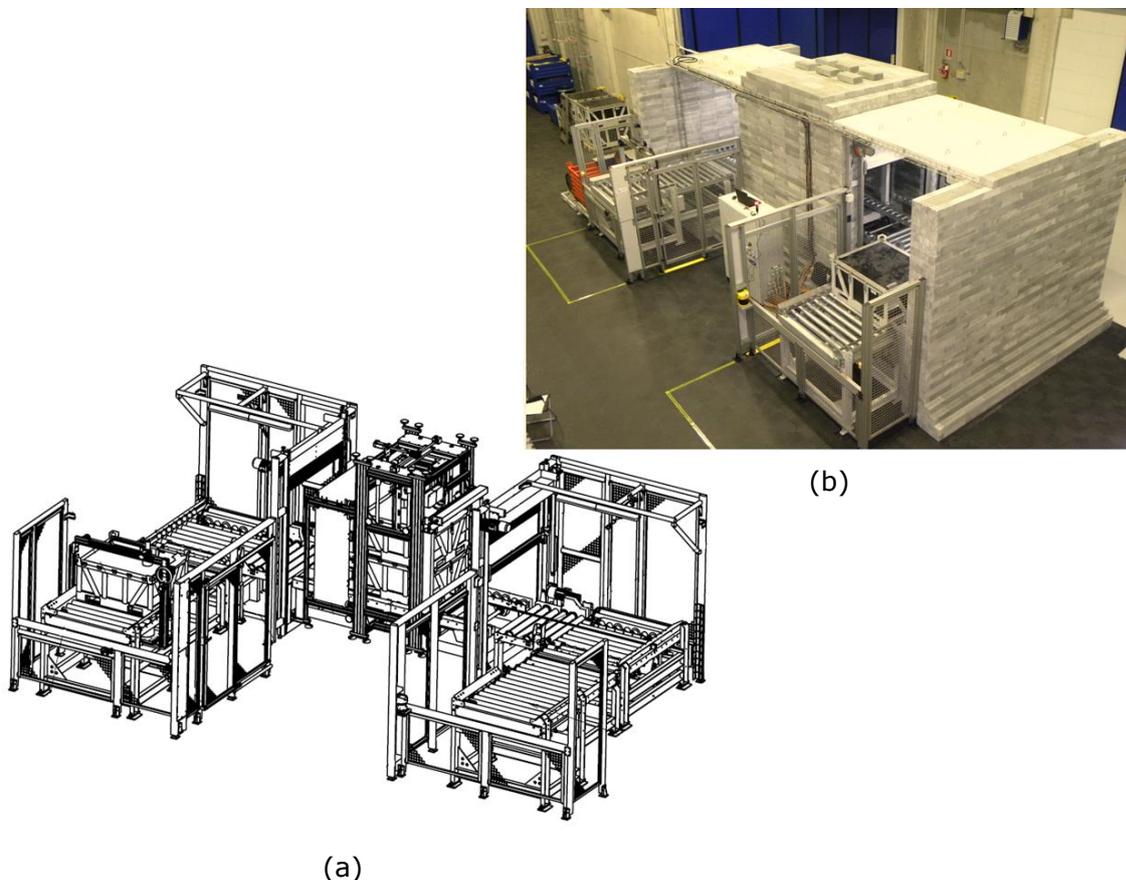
(a) Source: NUVIA Drawing H181-01-S000, 2016
